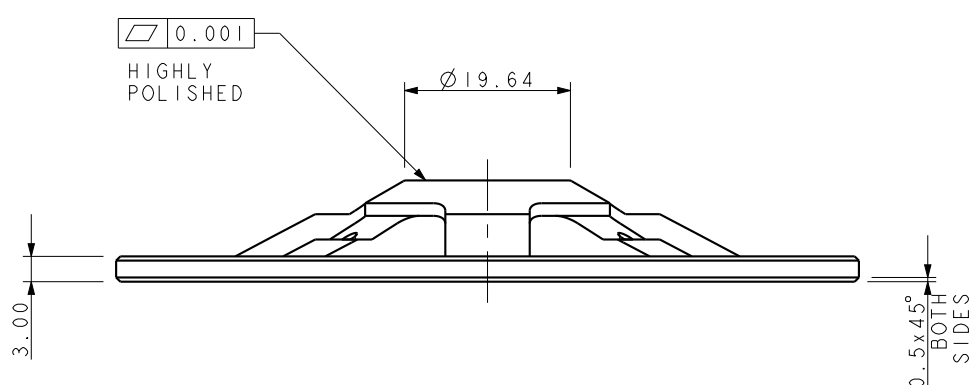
Drawing of the side view of a plunger degrader stretching cone.
